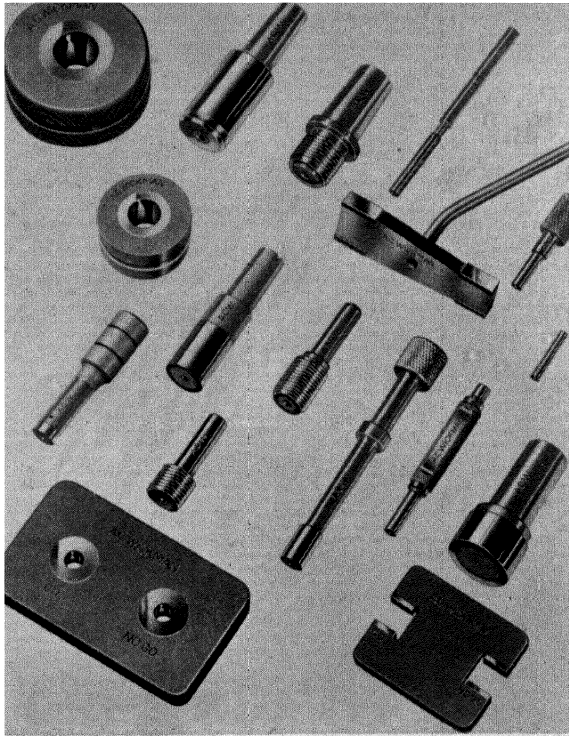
Assortment of wear-resistant parts and dies with cemented carbide facings or liners (courtesy of Carboloy Co., Inc.).
